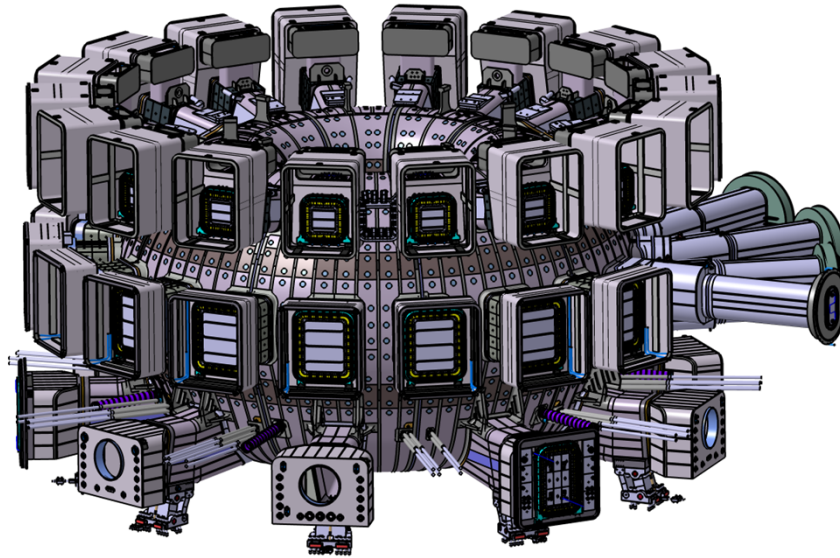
General view of the Vacuum Vessel & Ports, VV Gravity Supports and In Viewing Lower Penetration & Divertor Pipes
